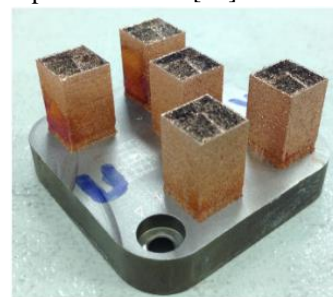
Cu-Cr-Zr-Ti specimens fabricated using SLM [51].
